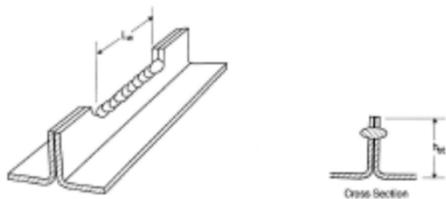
Top Seam Weld - Back-to-Back Vertical Leg Joint
